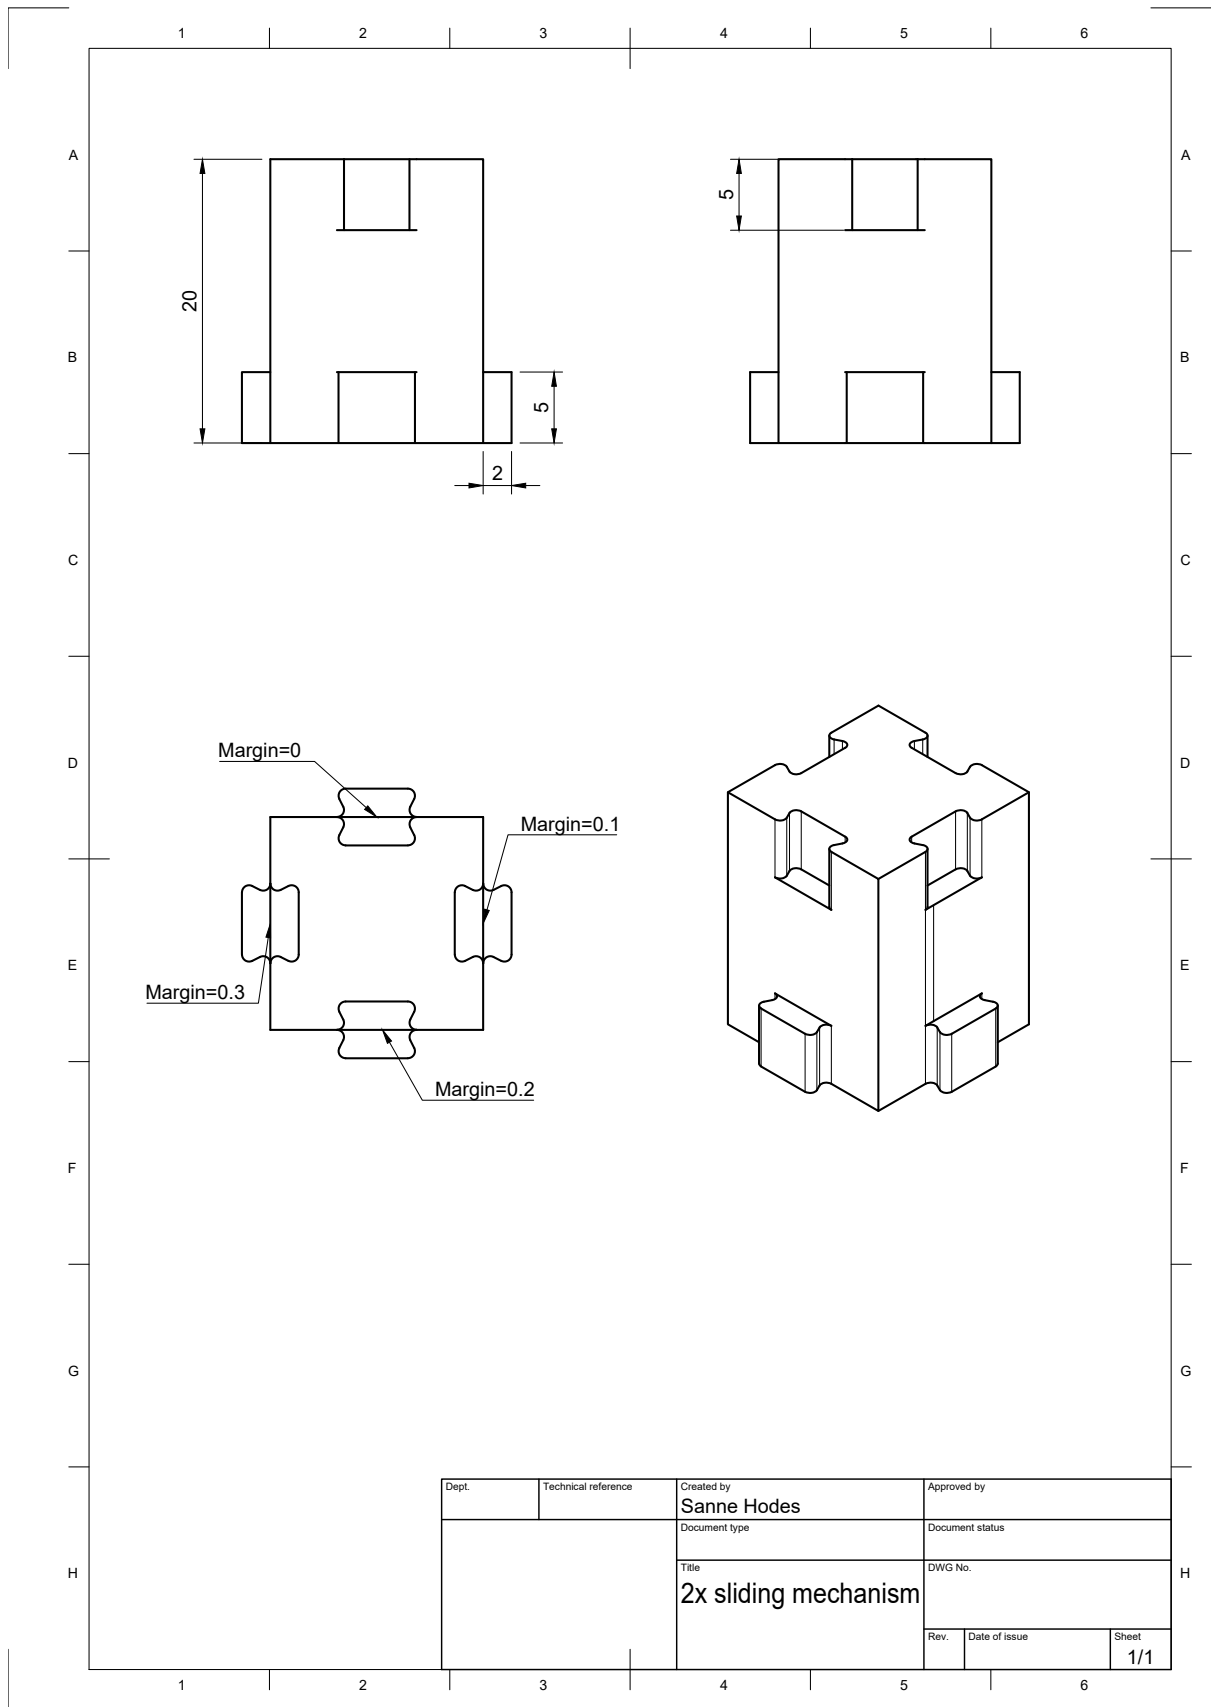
Technical drawing of the test cube with two times the sliding mechanism with the 2 mm extruding part
